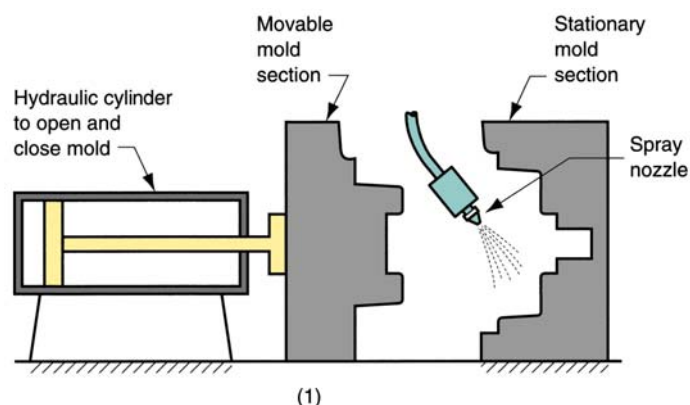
Steps in permanent-mold casting: (1) mold is preheated and coated (preheating facilitates metal flow and coating aid heat dissipation and lubricate the mold surfaces for easier separation of the cast product).
